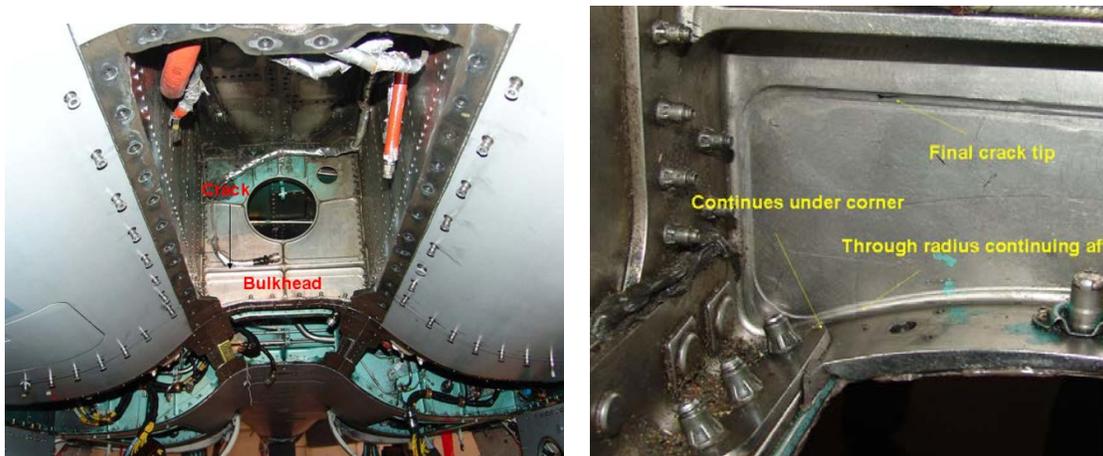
Pictures of the FS626 Bulkhead and where cracks have been found
